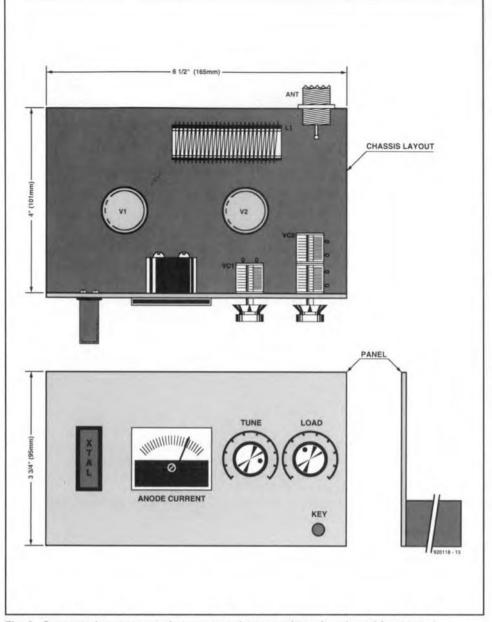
Suggested component placement on the transmitter chassis and front panel.
